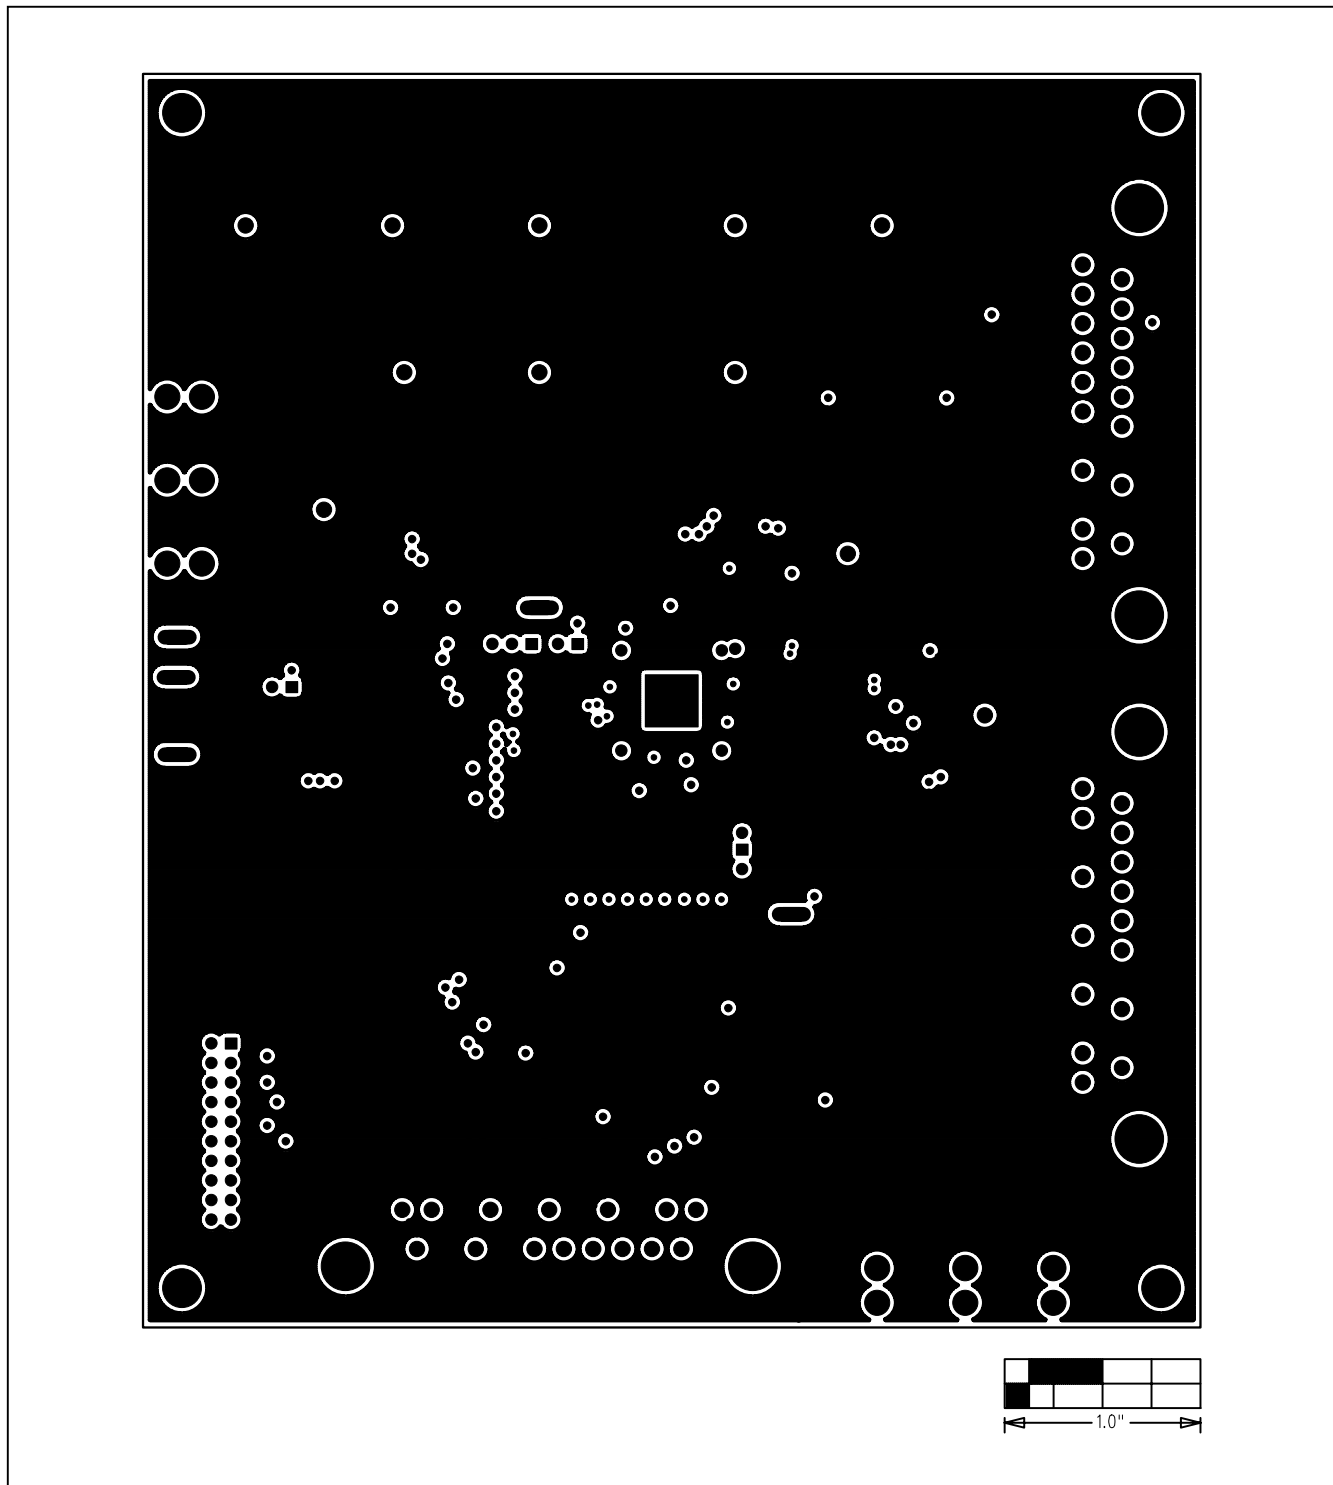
MAX4399 EV Kit PCB Layout—Inner Layer 2
